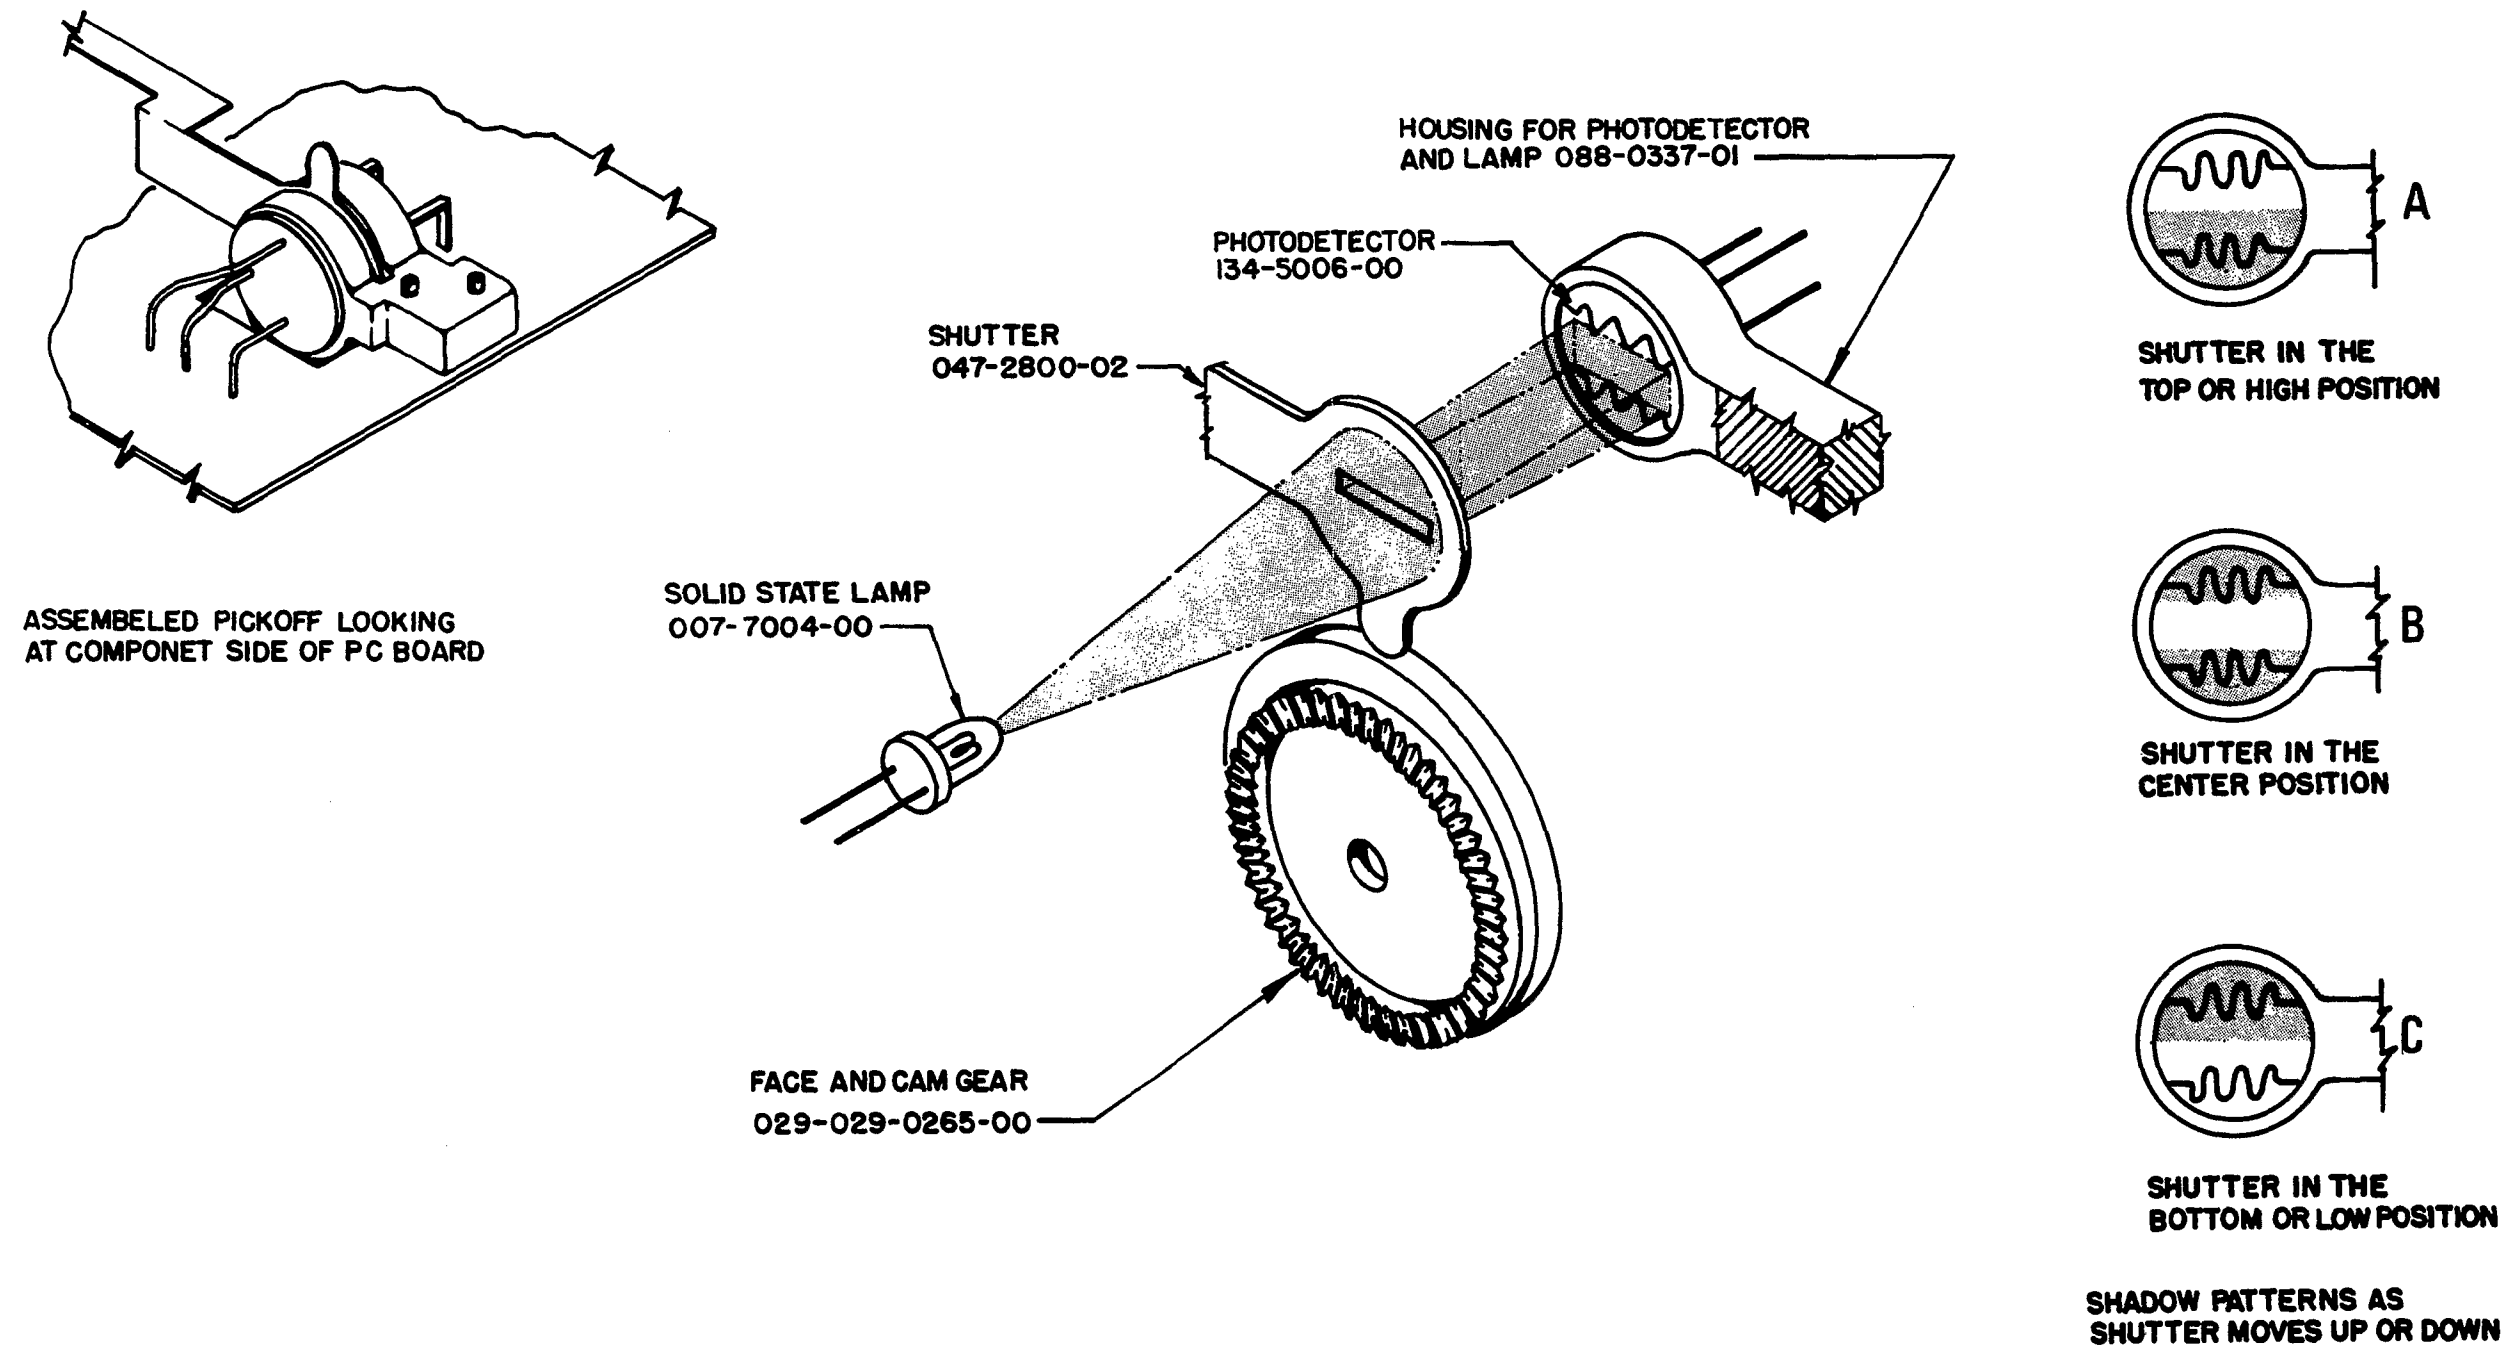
COURSE DATUM PICKOFF ASSEMBLY
